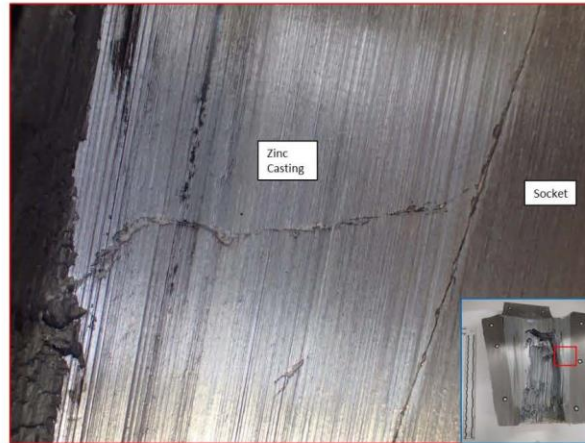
Close up view of the crack present in the zinc casting, running between the inner diameter of the zinc casting, where the cable/zinc slug pulled out, and the outer diameter of the zinc casting. Corrosion product, most likely zinc oxide, has completely filled the crack space. This image was taken from the 3 o'clock half at 12 o'clock.
